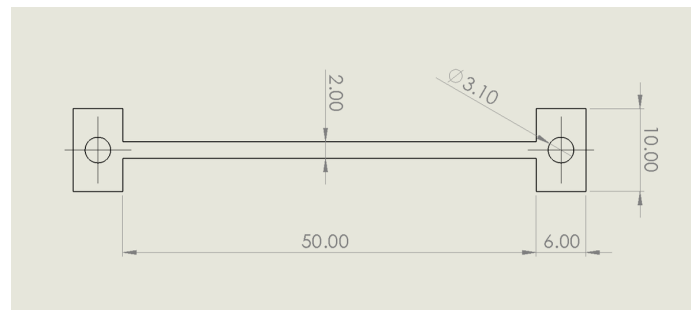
Drawing of SMA actuator shape (in mm) [60].
